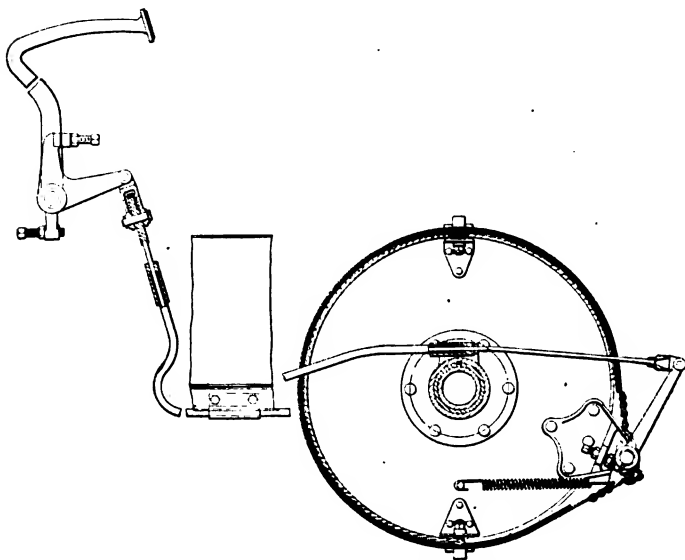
CABLE TYPE OF SERVICE BRAKE USED ON THE LEXINGTON CAR. The Position of the Operating Lever Behind the Axle and the Accessible Adjustment Should Be Noted
